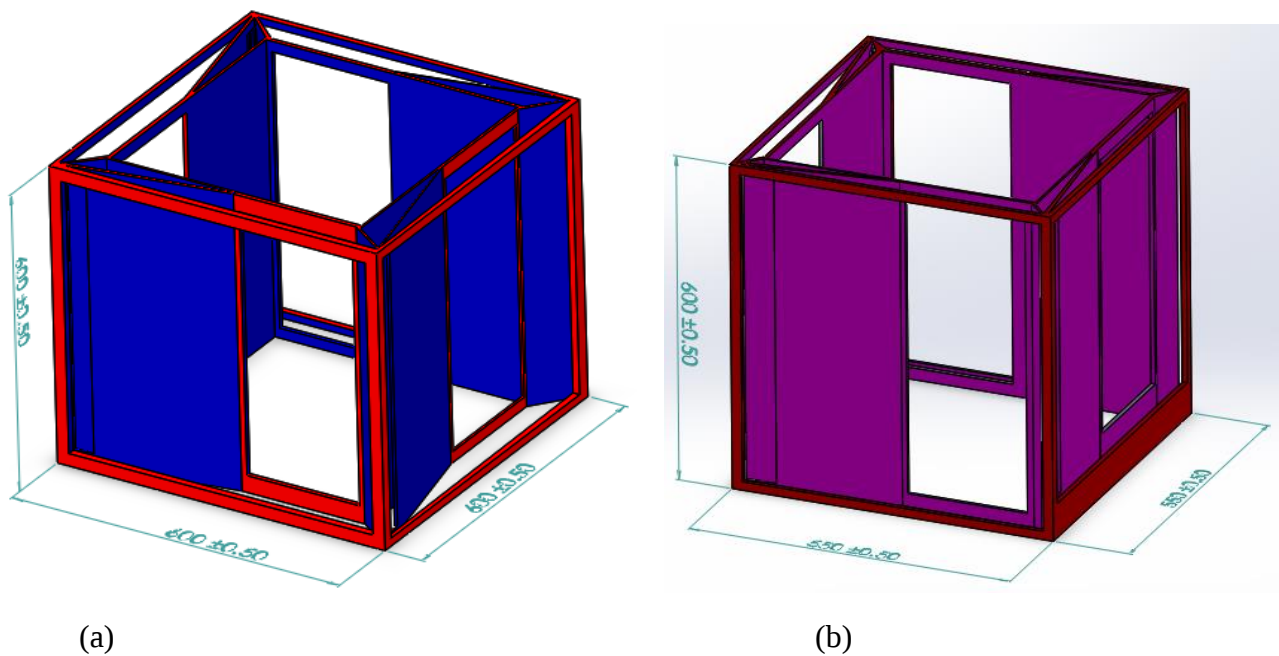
6: 3D –model of: (a) - medium air jet mechanism and (b) - shorter air jet mechanism
